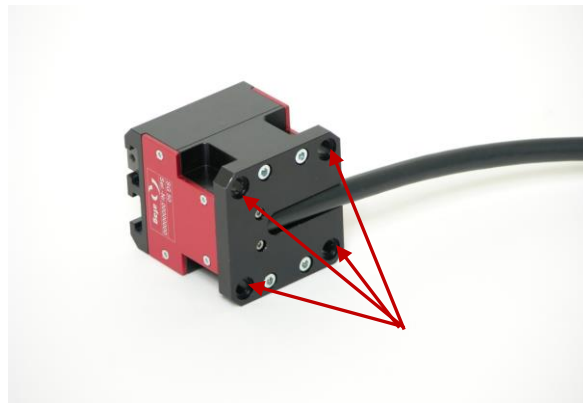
Mounting holes on the housing - 4 x Ø 5.3 mm
